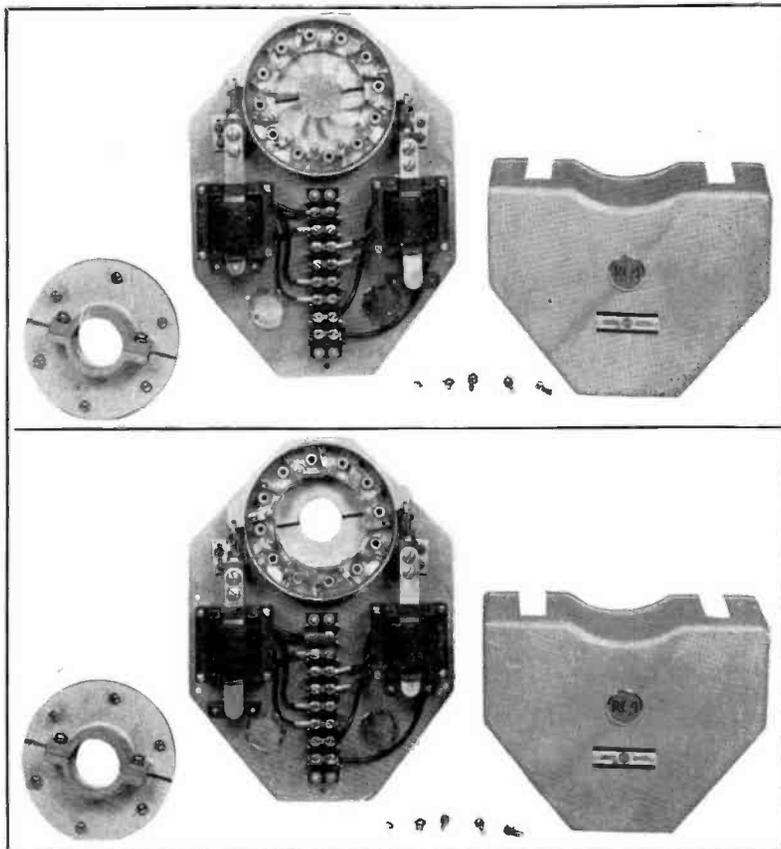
(above). View of the shorting switch in the "open" position. Mounting flange is shown at left and protective cover at right.
